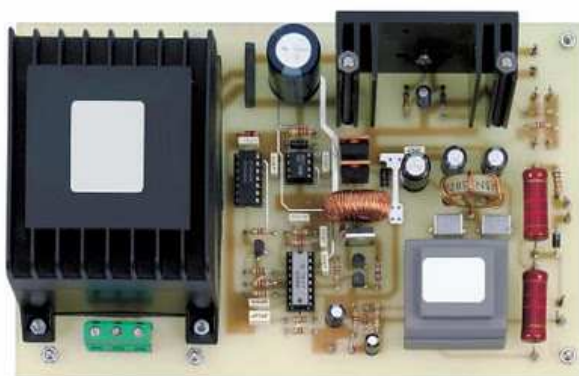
Photograph of a prototype of the regenerator plate CRT EN1659. The heatsink of the regulator IC3 has been mounted (it is attached to it by two bolts). Pay much attention to the direction of insertion of the integrated circuits that support and do not install after mounting the plate in its housing (see Figures 10 and 11).
